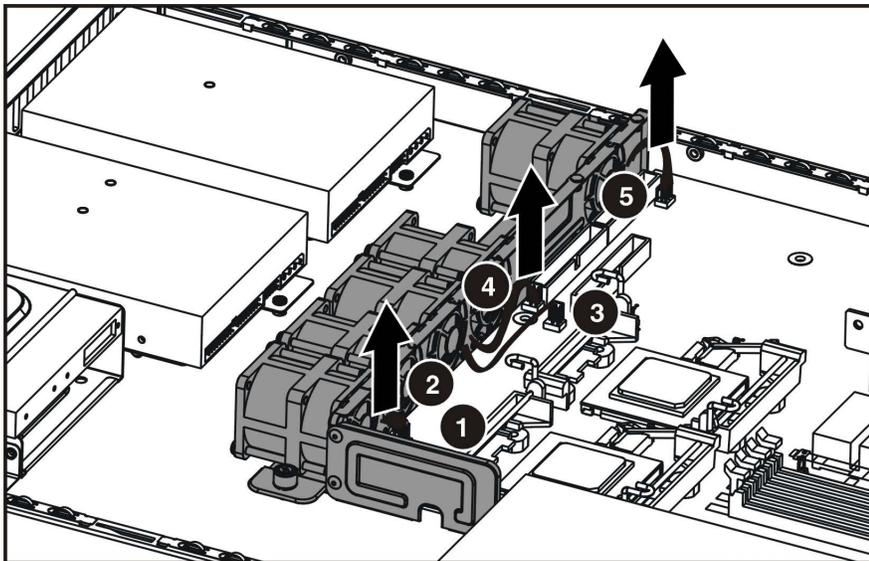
Disconnecting the fan bracket power cables (processor heatsinks removed for clarity)
